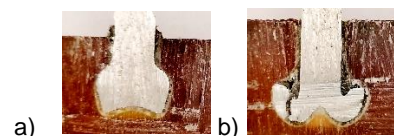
Macrosection of the rivet a) bell shaped and b) anchored shaped
